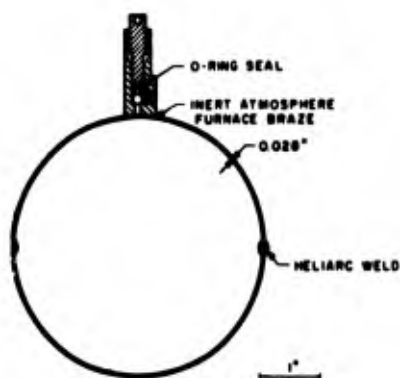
Weighing bomb. Specifications: valve material, type 303 ss; sphere material, PH 15-7 Mo ss; total weight, 230 g; inside diameter, 4 in; working pressure, 750 psi.
